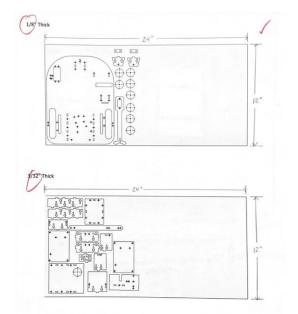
SolidWorks Layout of All Laser Cut pieces for Milestone 4
